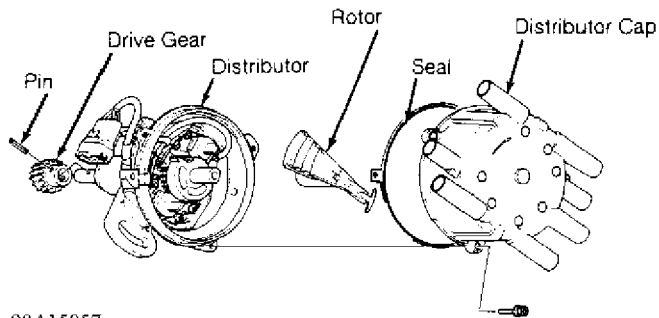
Exploded View Of Distributor (B2200 PFI, B2600i, MPV 2.6L, Protege & 323)
